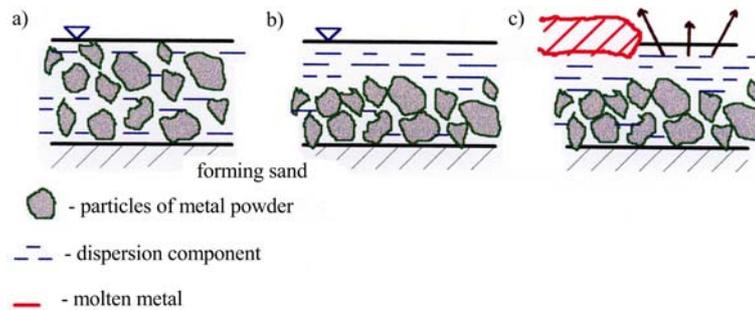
The mould's coating during casting a) mould's coating after spraying, b) sedimentation of metal particles, c) molten metal pouring
